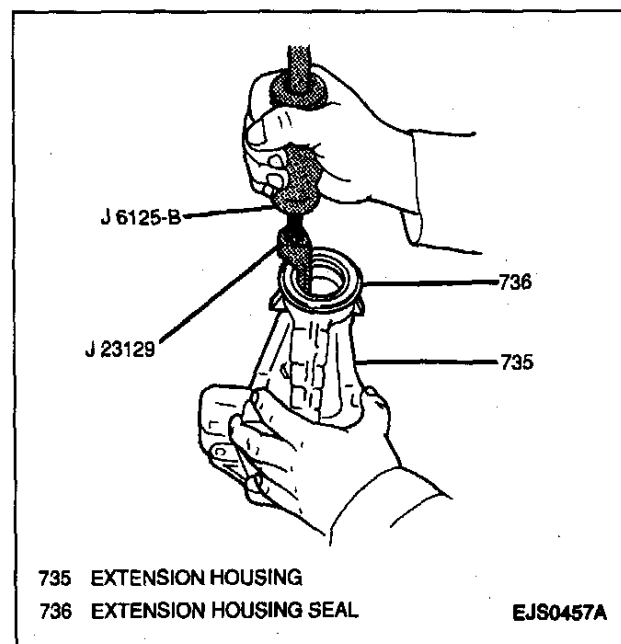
Removing Extension Housing Seal (3L30, 3-Speed)
